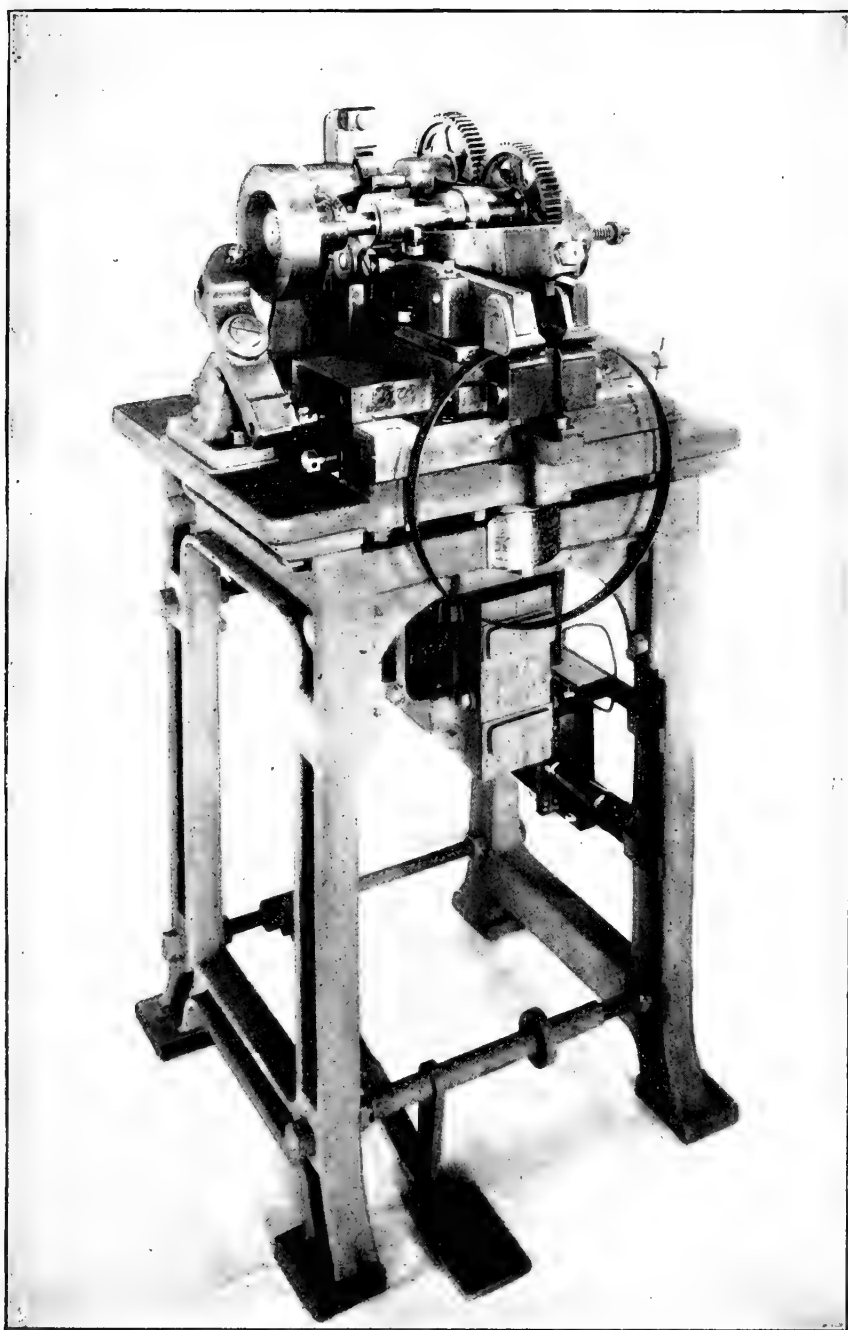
AN ELECTRIC WELDING MACHINE FOR IRON AND STEEL PIPE.
